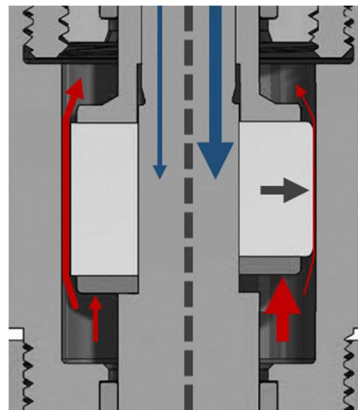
shows the section view of the STF coupling. The piston rod is assembled of four parts: upper rod (inside threaded nut), elastic piston, washer and a lower rod (threaded end). The piston and washer sit on a turned part of the lower rod, fixed between the collar of the upper rod and facing on the lower rod. The washer acts as a sliding collar for the piston, while the collar on the upper rod is fixed. This design makes the coupling function asymmetrical, so the force coupling is higher in the direction of tension than compression. Therefore, the foot is expected to lock-in at lower velocities, and more aggressively on forefoot load than it will on hindfoot load. The assembly is fixed by threading the lower rod into the upper rod. The piston rod assembly is guided by bushings and sealed to the outside with hydraulic seals, fitted in the cylinder and cylinder-cap.
